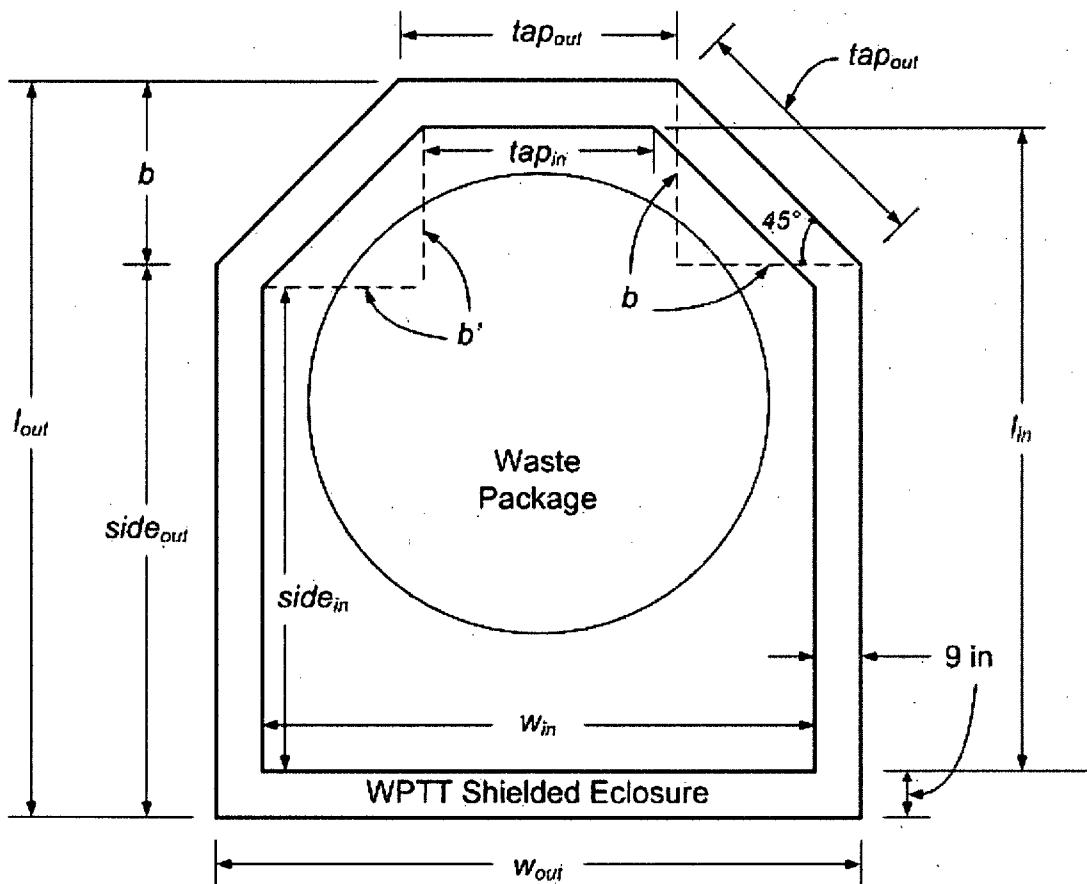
Cross-Section of Waste Package in the WPTT Shielded Enclosure
